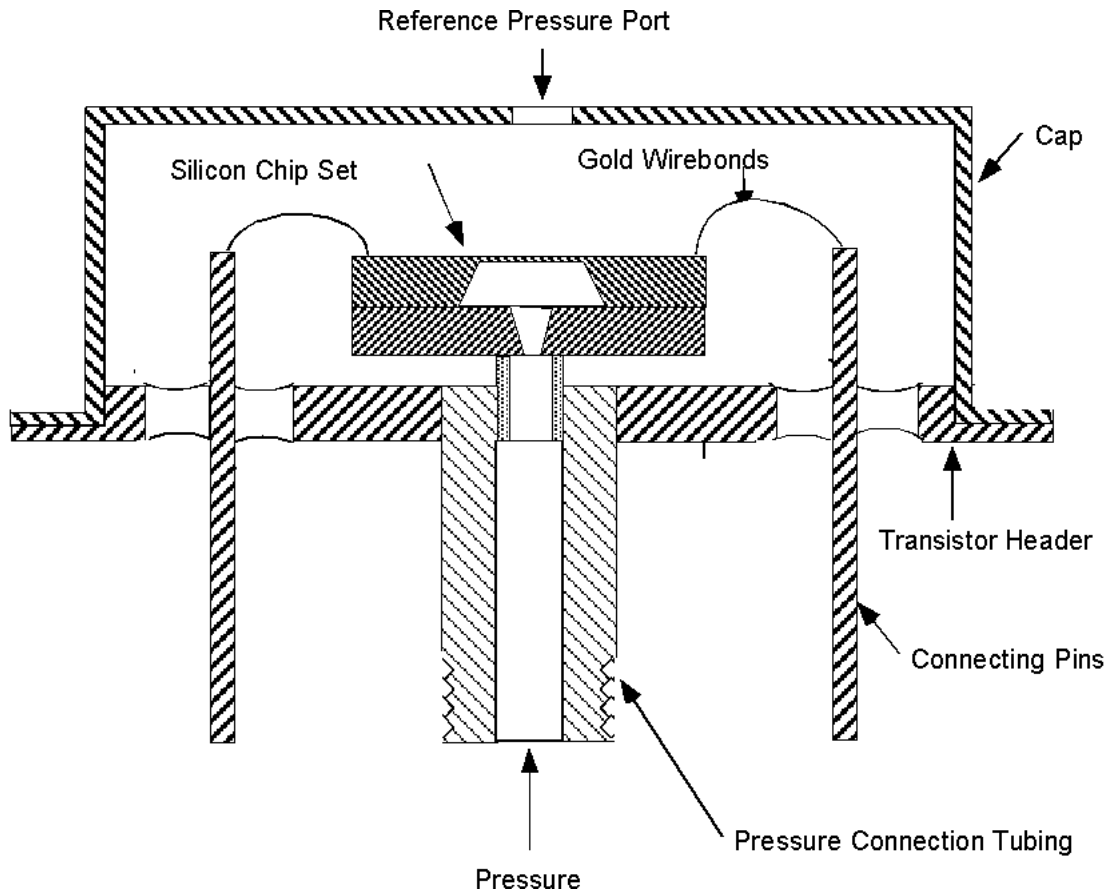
Cross-sectioned view of the SP80 Pressure Sensor packaged in a transistor header.
